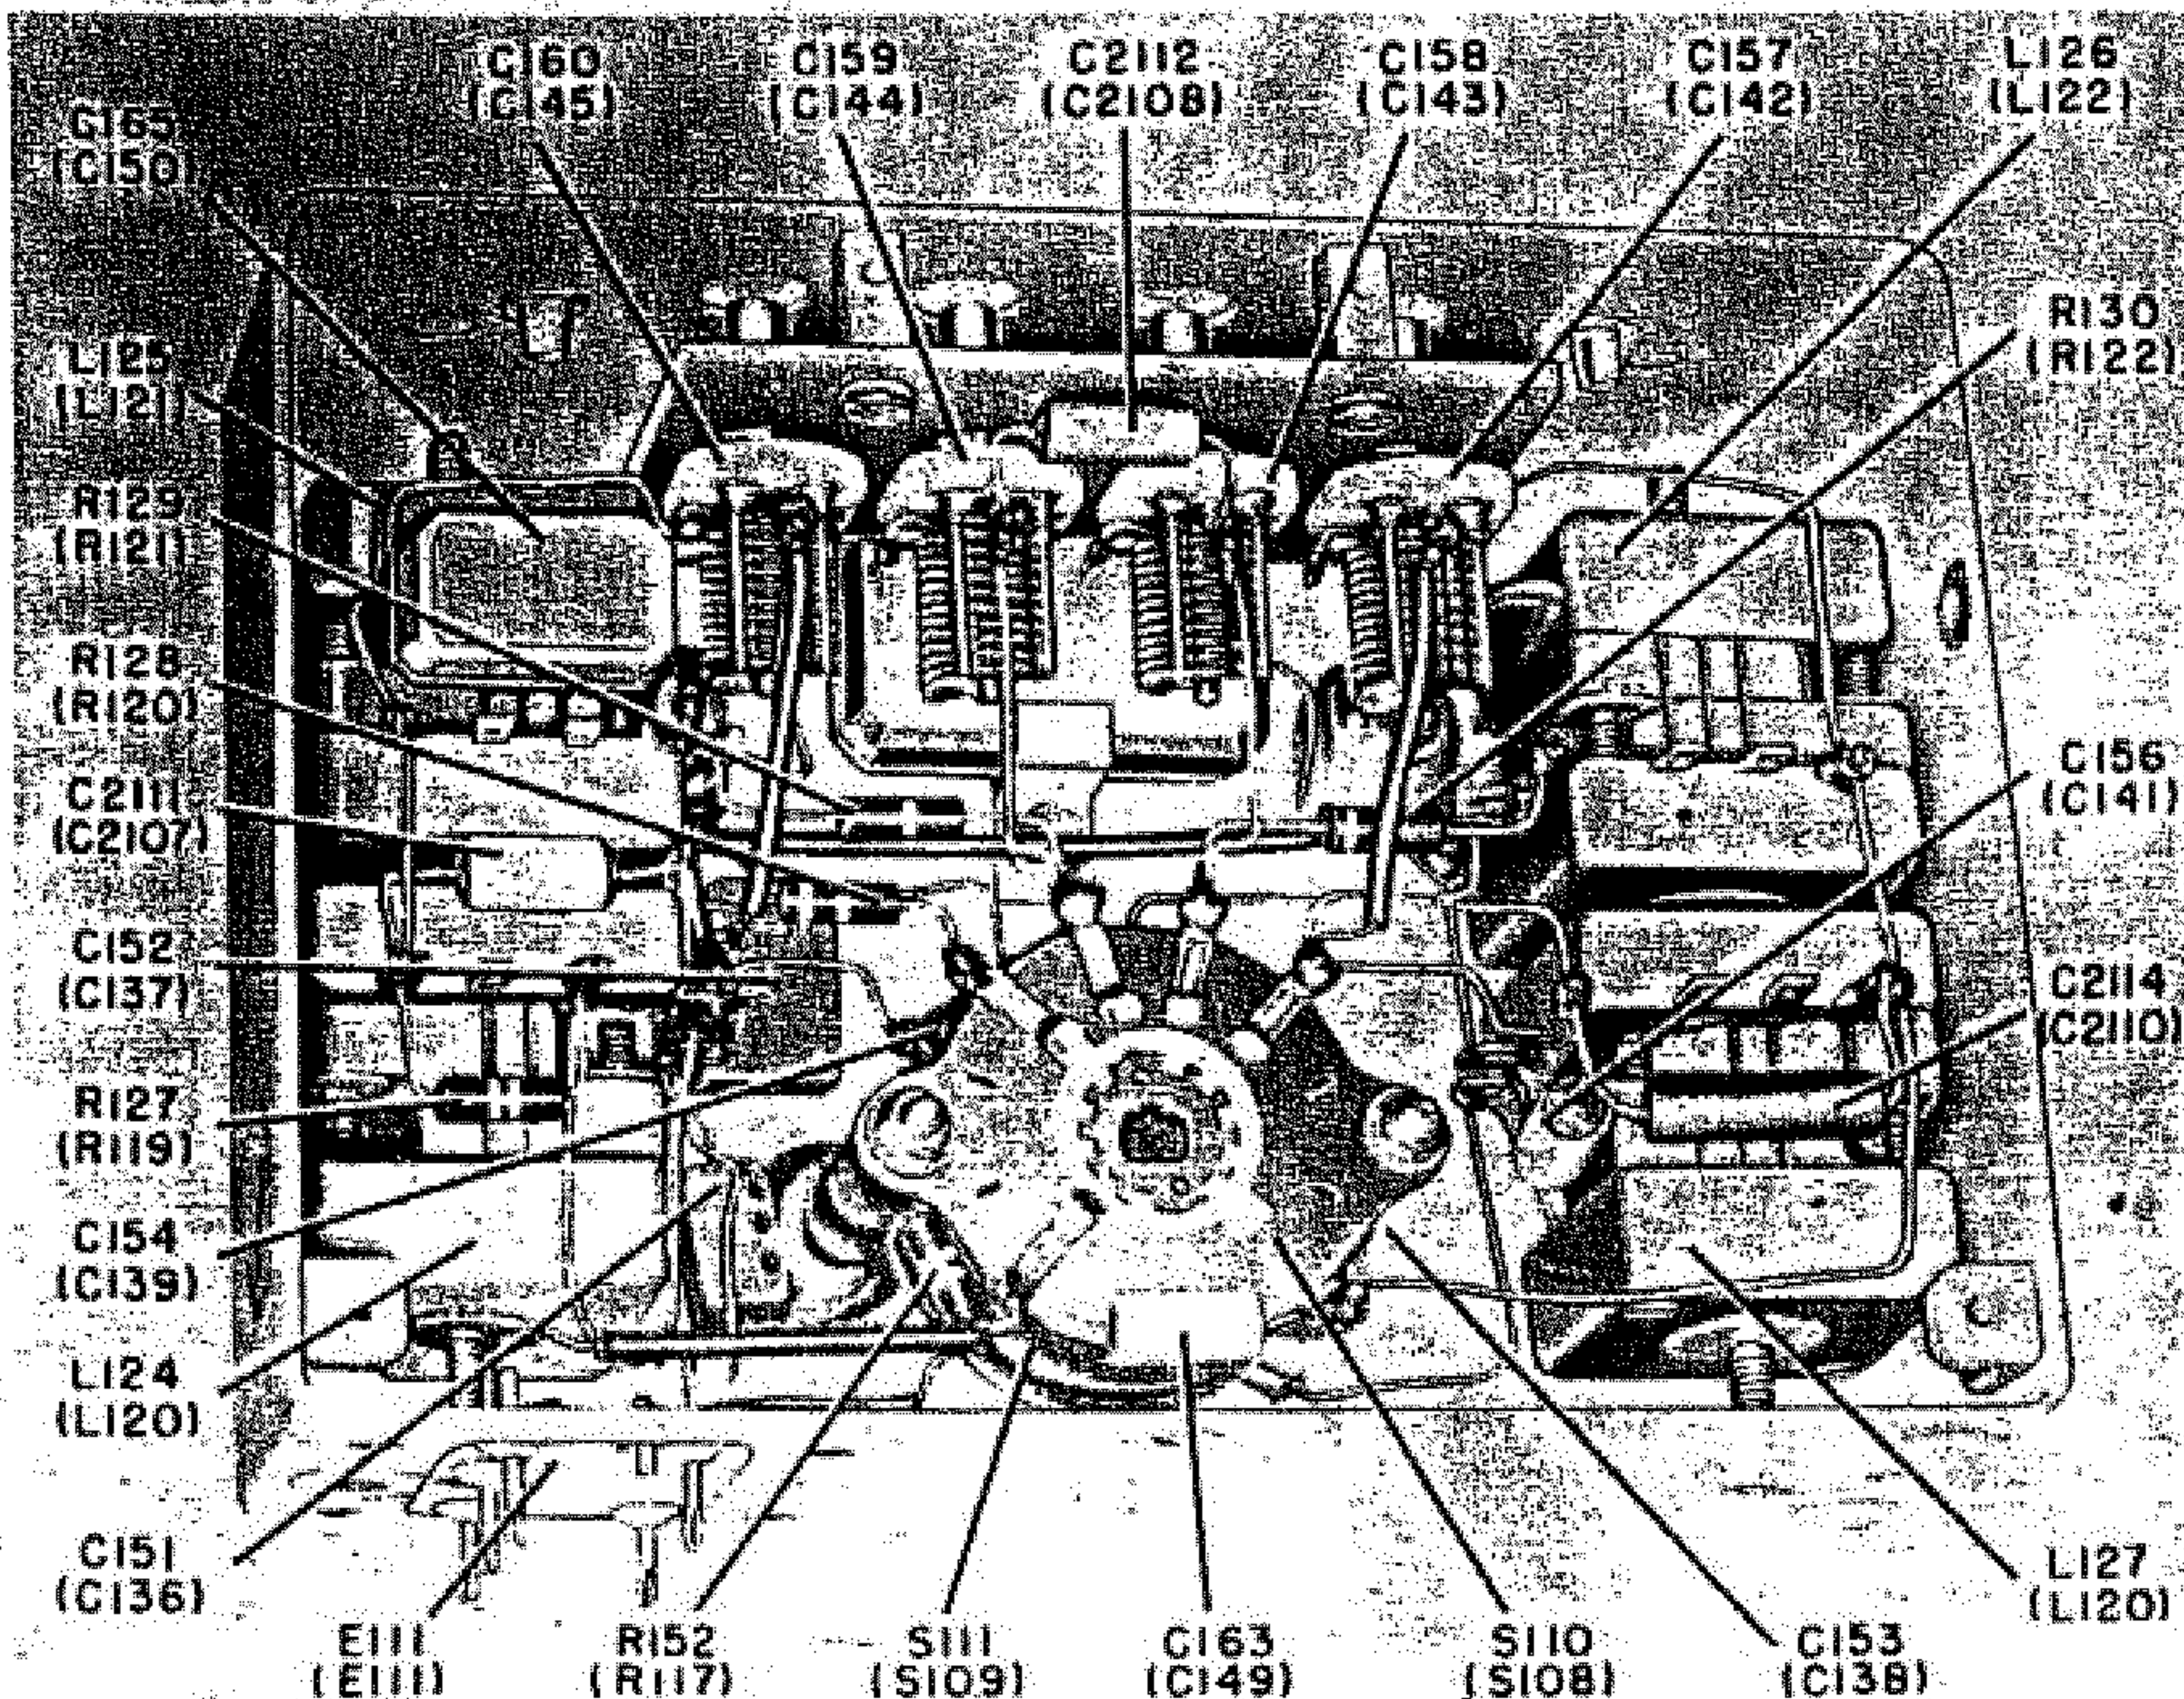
A. First or Second RF Transformer Assembly L-104 or L-105, Cover Removed (Radio Compass Unit R-101B/ARN-6)
